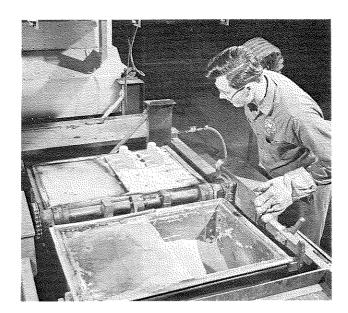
The sand contains a binder that is heat responsive. Thus when the sand and pattern come in contact, the heat from the pattern is sufficient to bond a thin layer of sand to it as shown here. A flame torch is then used to provide the additional heat needed to harden the sand layer completely.
